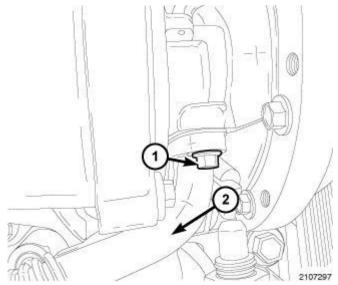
Turbocharger Oil Return Line Courtesy of CHRYSLER LLC
